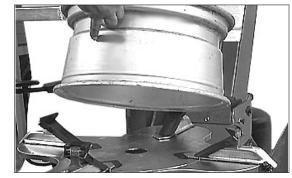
A - Clamp Wheel (Tire Removed for Clarity)
